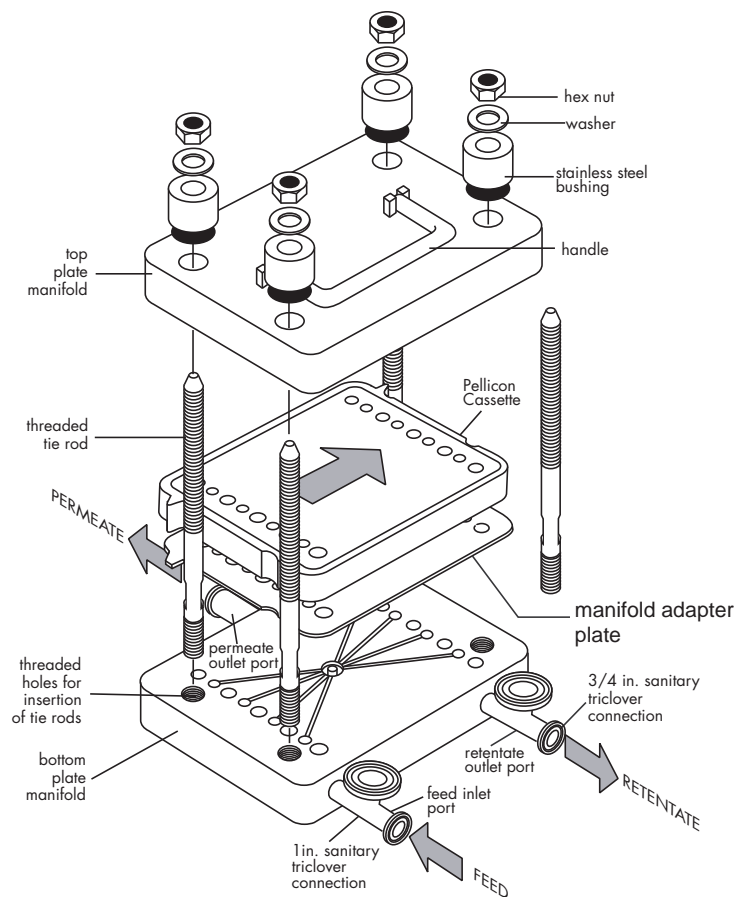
Exploded View of Stainless Steel Pellicon Cassette Filter Holder.
